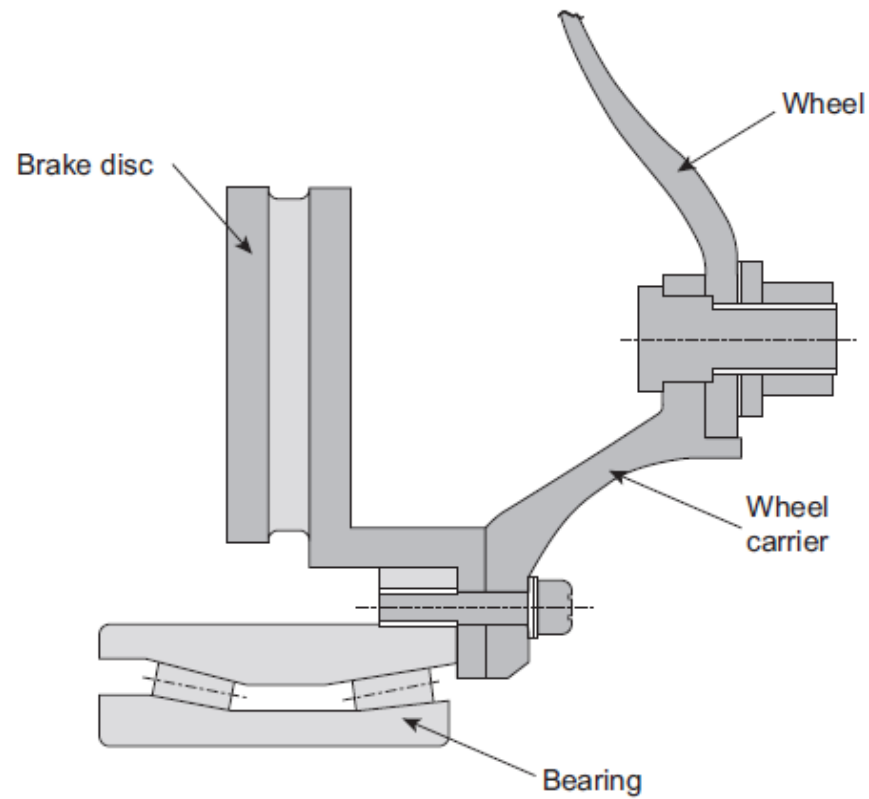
Cross-Sectional View Through a Typical Commercial Vehicle Front Wheel, Hub and Brake Assembly (Tirovic, 2013).
